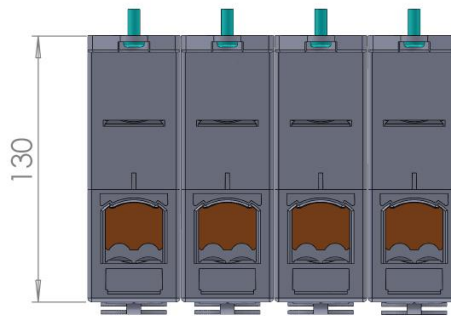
Perspective Drawing of Incoming (SEC) Terminal Block Assembly for Double-Meterbox with Steel Enclosure (Two-Level Cable Entry on Incoming Side)
